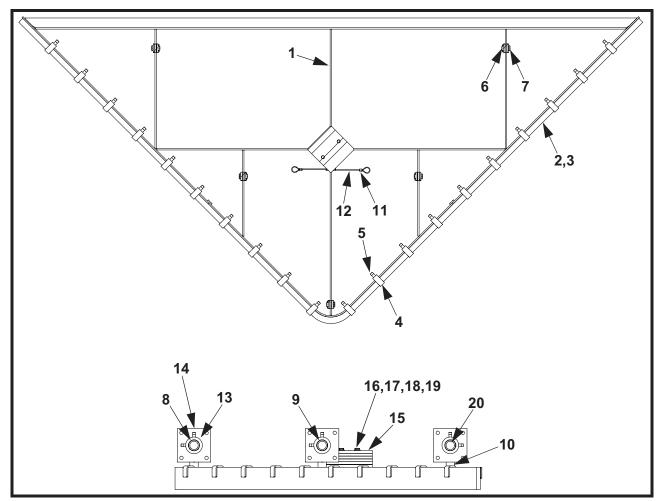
Martin[®]VPlow HD Assembly, P/N BUS14092-XXXXXXXX (108 - 120 in. [2700 - 3000 mm] belts)
